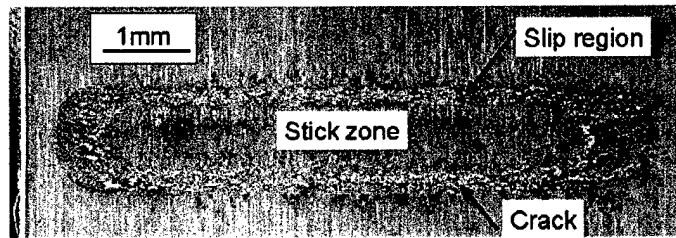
A large crack developed near the maximum edge of contact in Specimen # T2.
